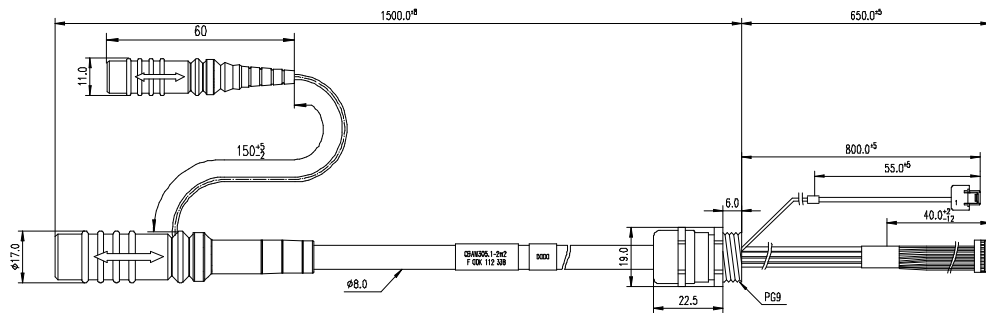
CBAM305.1-2m2 Cable - Dimensions
